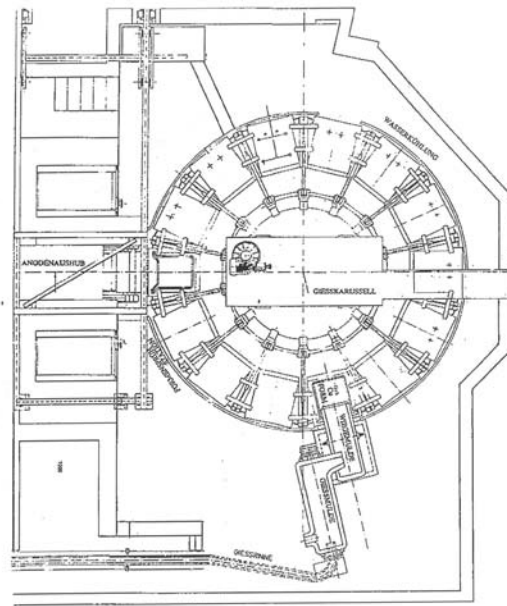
Casting wheel at Montanwerke Brixlegg AG
